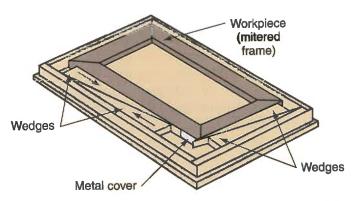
Make a simple wedge clamp to assemble small frames quickly.
